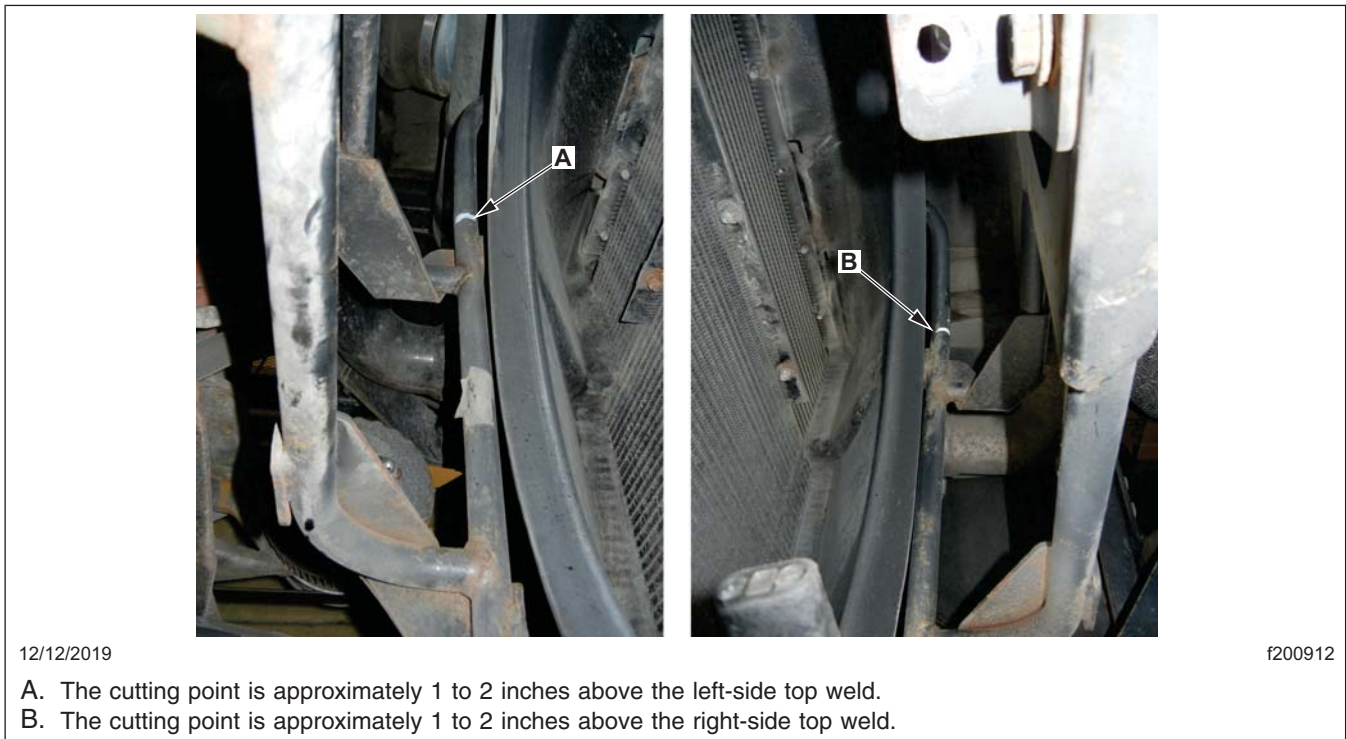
, Approximate Cutting Points for a Welded Fan Cage
